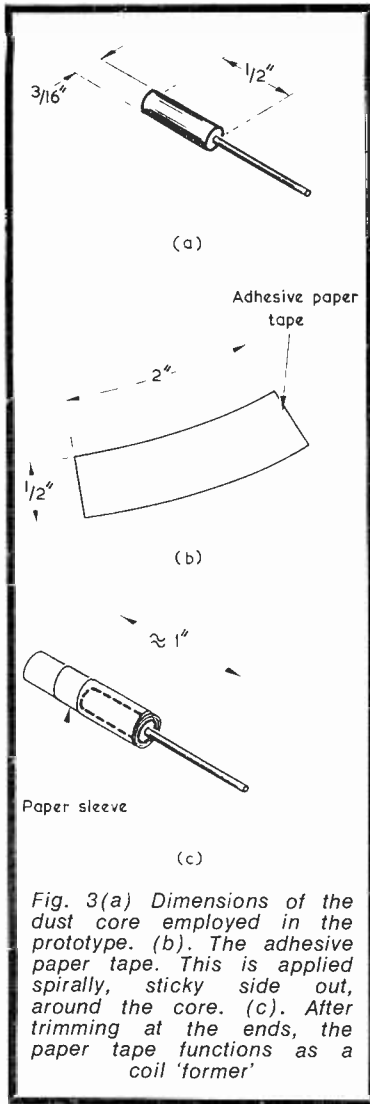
(a) Dimensions of the dust core employed in the prototype. (b) The adhesive paper tape. This is applied spirally, sticky side out, around the core. (c) After trimming at the ends, the paper tape functions as a coil 'former'
